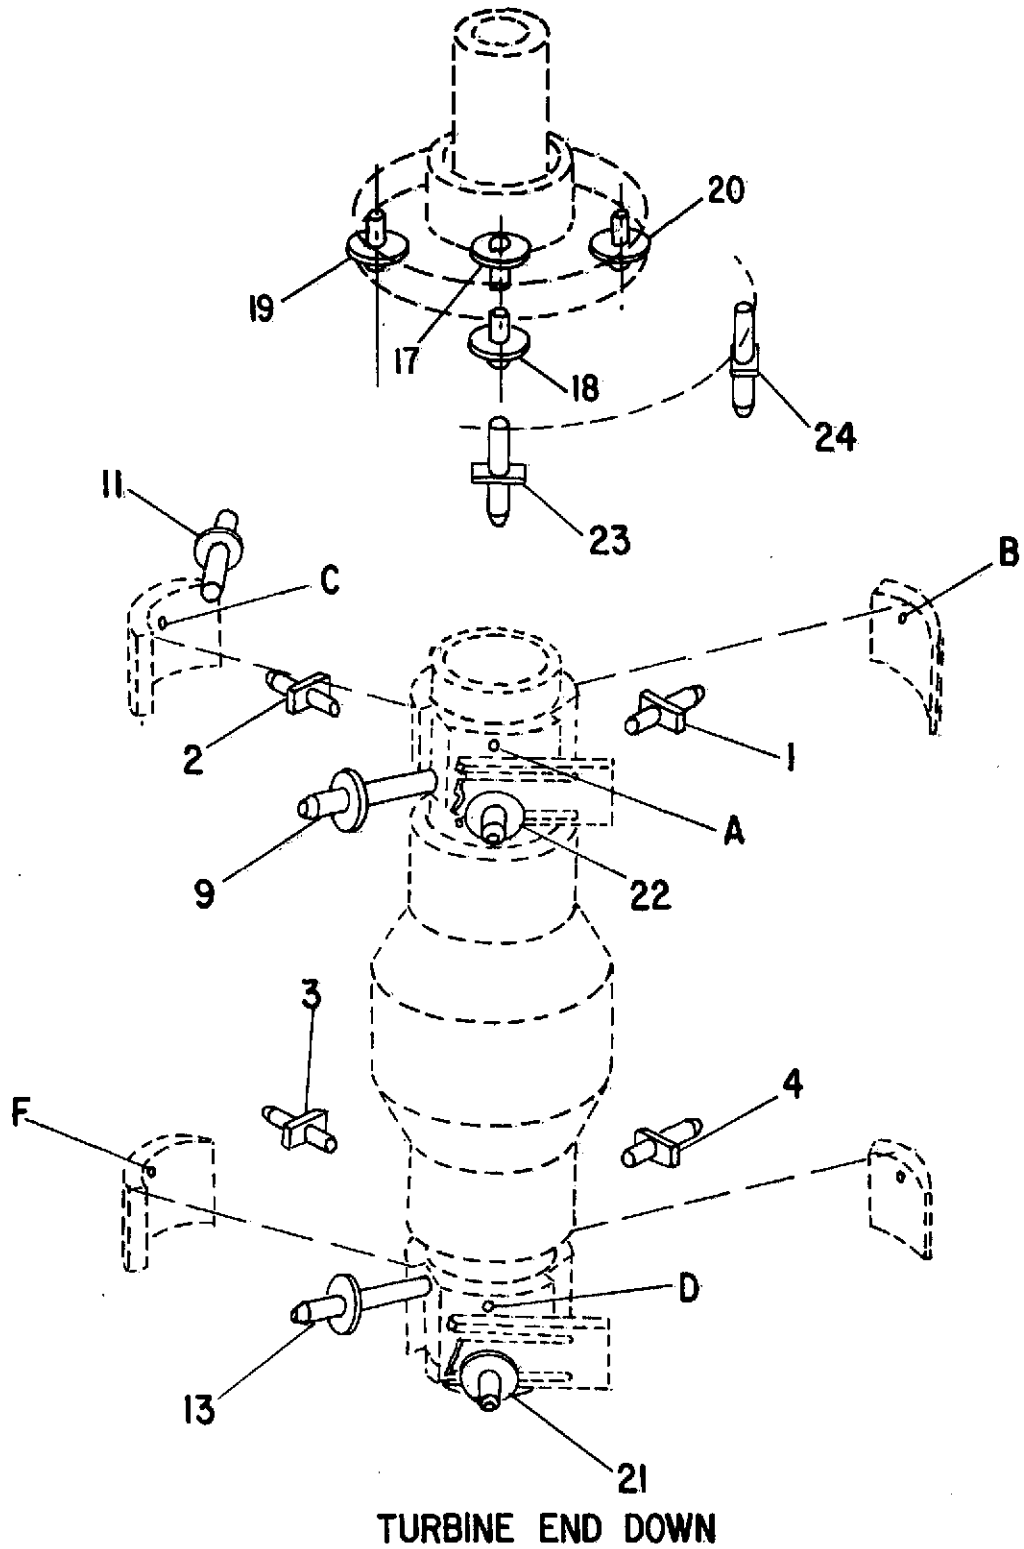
Proximity Probe Locations On BRU Simulator Rotor And Bearings
